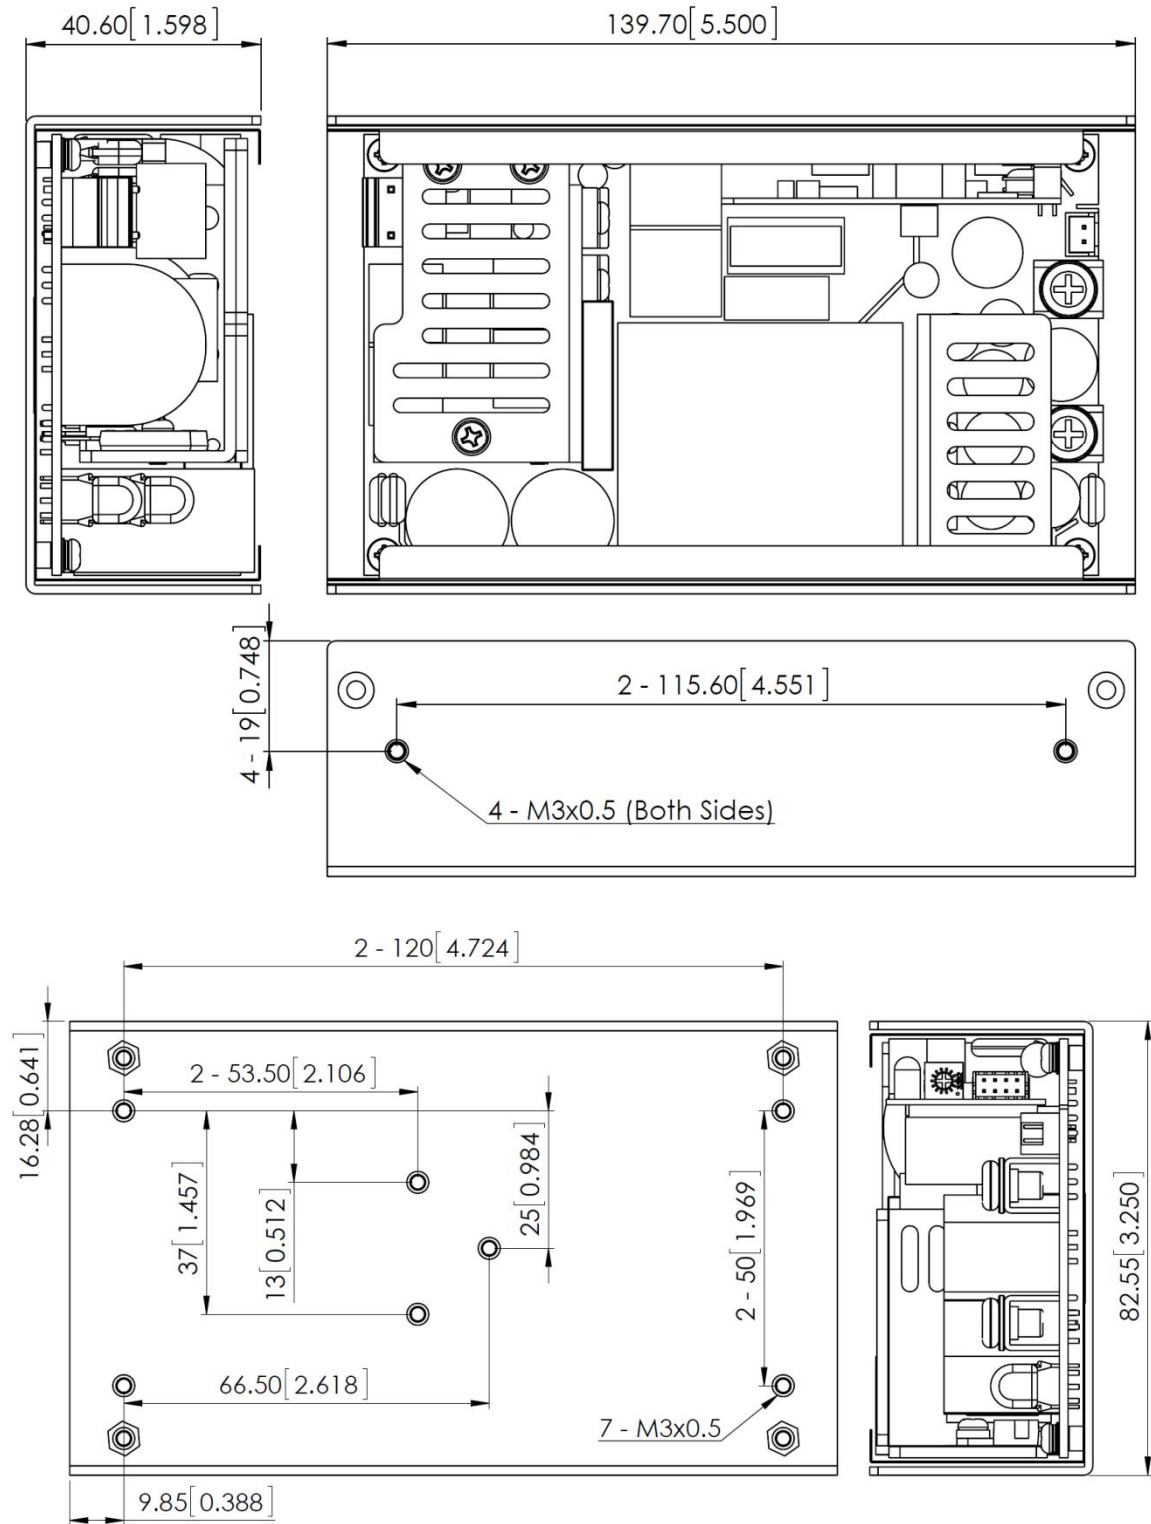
XLMU500 Mounting Hole Locations and Dimensions
